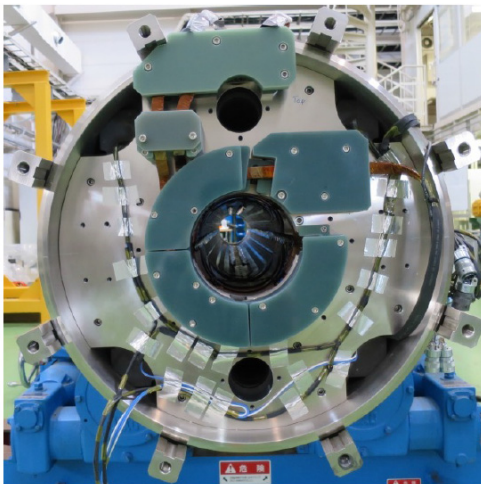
2 m model magnet after shell and end-ring welding, and splice work for ramp leads.
